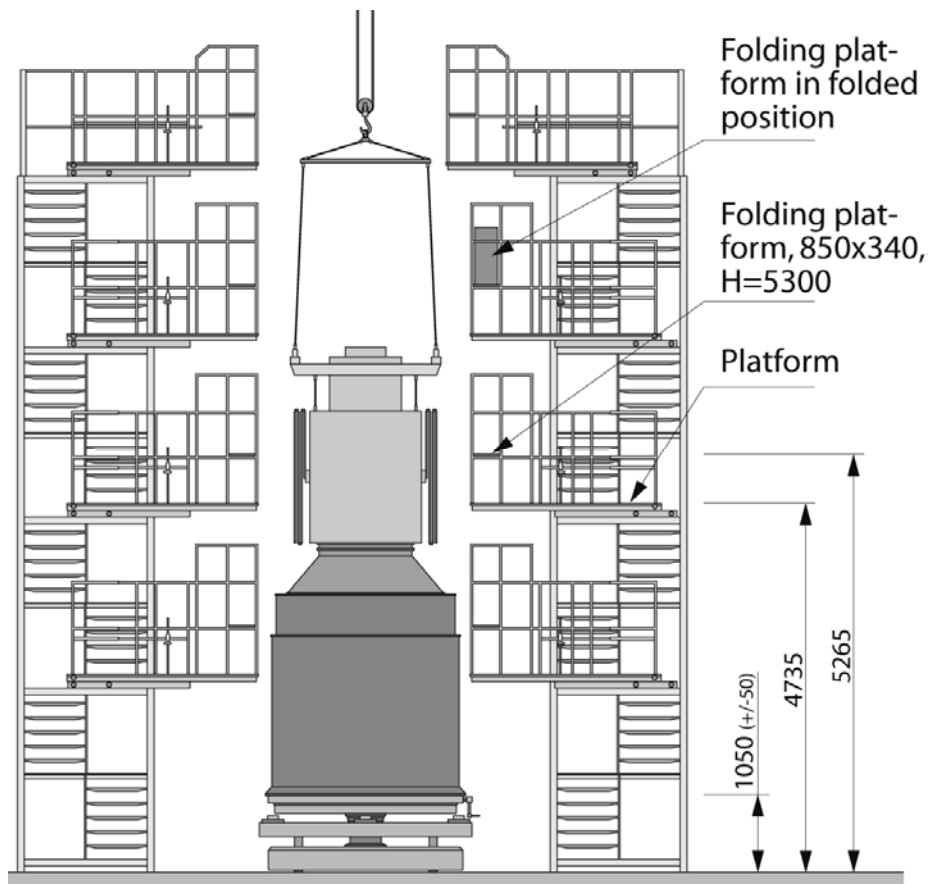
Assembly stand with platforms in upper composite integration room.
